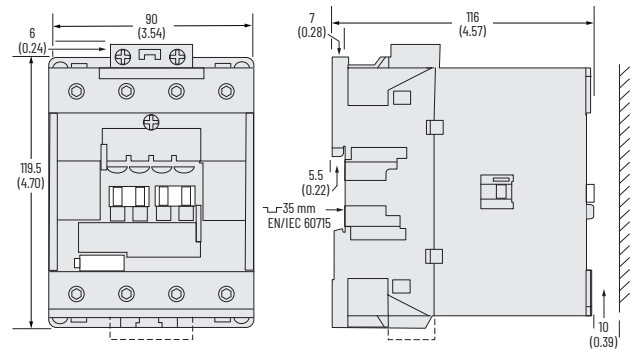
100-E80 4-Pole Contactors with Front-mounted Auxiliary Contact
